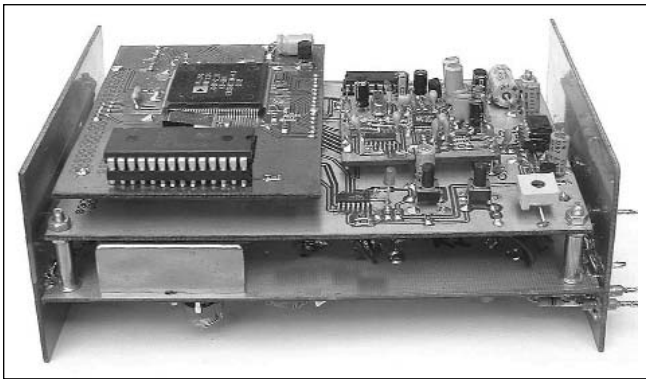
The DSP assembly. That is, the DSP mother board with CODEC and Processor daughter boards - mounted back-to-back with the IF board in its enclosure. The top, bottom and side screening panels are not fitted until after final test
